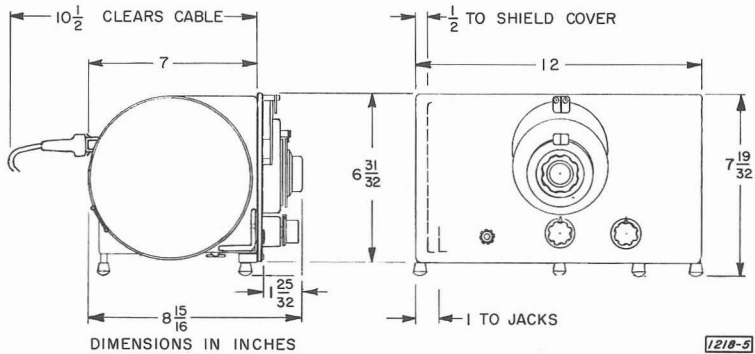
Clearance dimensions for the Type 1218-B oscillator.
